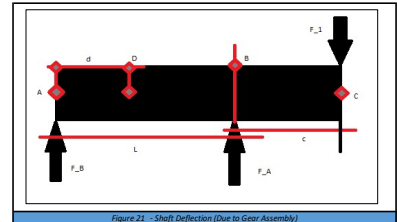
Shaft Deflection (Due to Gear Assembly)
